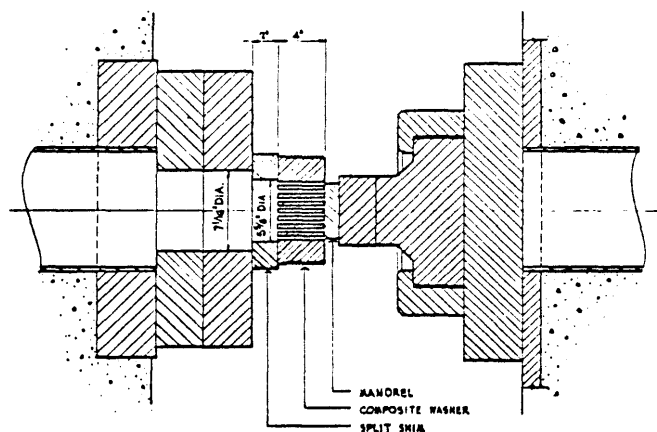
Fixture for Series B1 tests. Components being tested are shown shaded. Mandrel conforms to shape illustrated in Fig. 3.3-11 for Path 1 shear failure mode.
